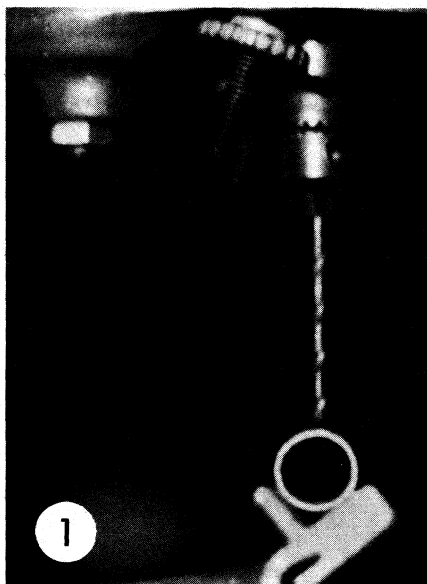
Drill stand for working aluminum tubing is made from a piece of V-shaped aluminum bolted to a piece of wood. Photo 2: Speed nuts hold the element to the boom. Photo 3: Detail showing element-to-boom mating using speed nuts. Photo 4: Final assembly of element to boom. A coat of silicone rubber protects the joints from rust. Photo 5: Use the drill bit as a gunsight for alignment when drilling holes for the other elements. Photo 6: Complete 432-MHz homebrew Yagi antenna. Antenna elements are welding rods; entire antenna cost just over \$5.00.
